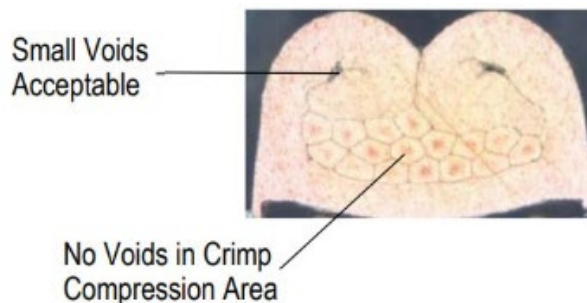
Example of Acceptable Wire Crimp - Stamped & Formed Connectors
